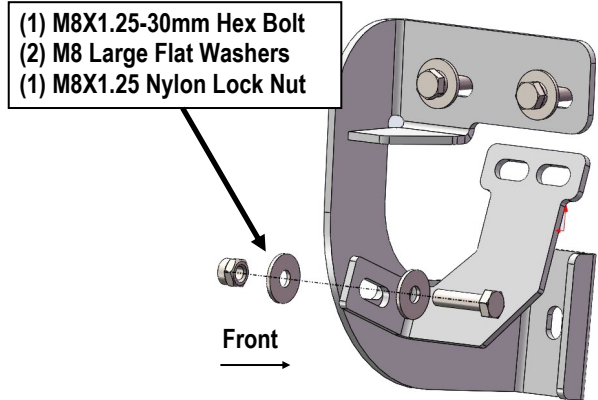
Driver Side Front Mid 2015-On, An Example Of Models With Factory Installed Threaded Inserts
